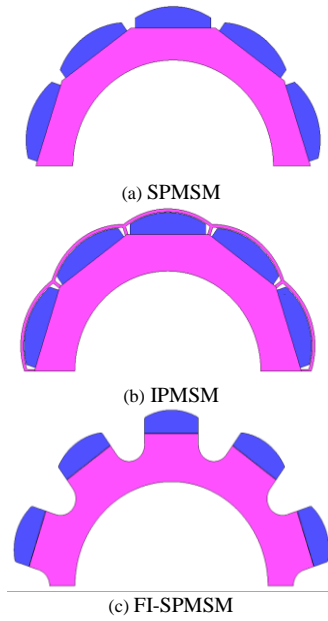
Cross-sectional view of rotor design for SPMSM, IPMSM, and FI-SPMSM
